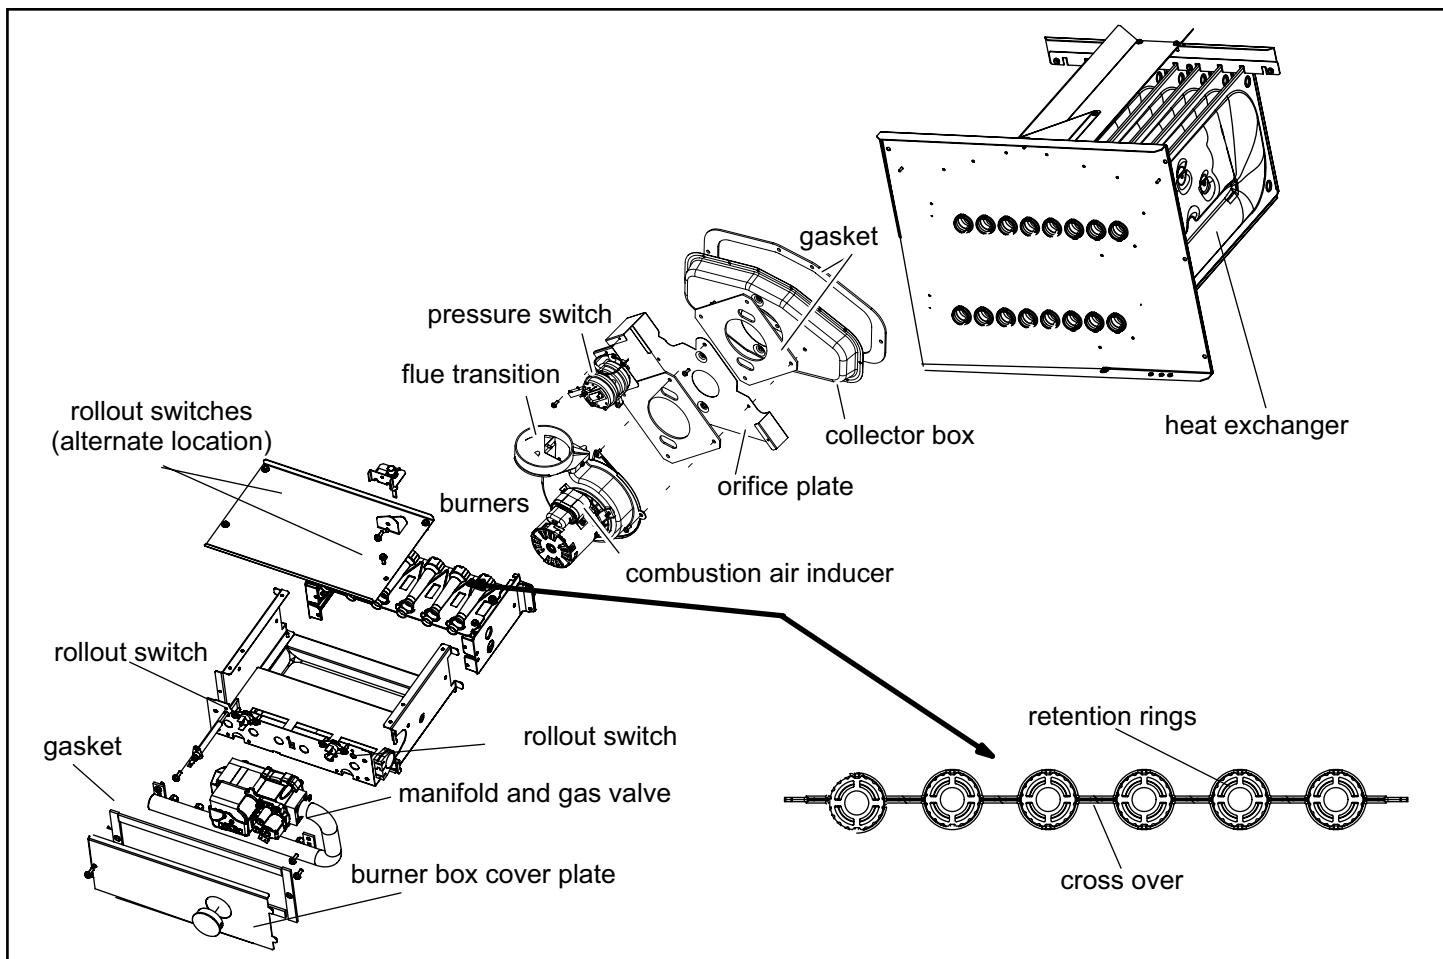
A80US2V Burner, C.A.I. Assembly, and Heat Exchanger Removal
